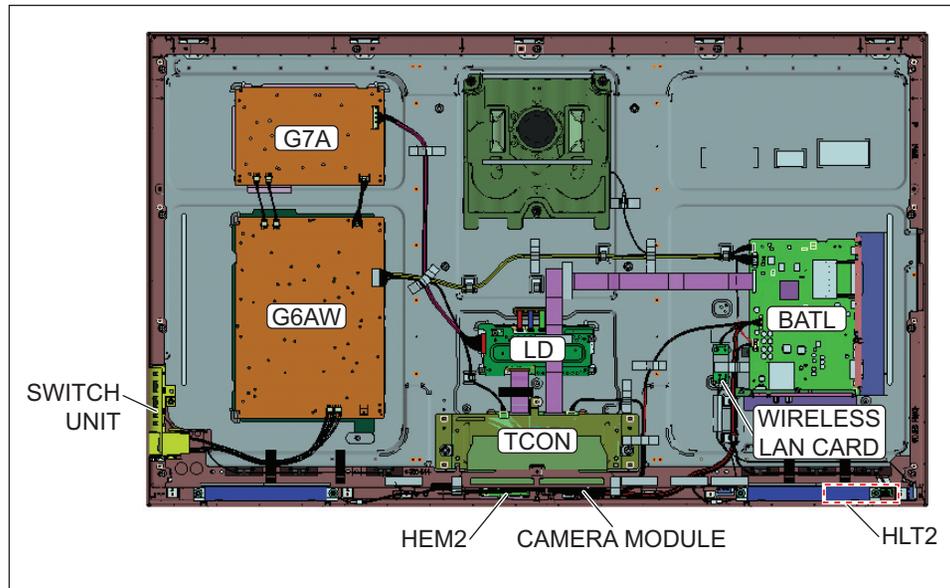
BOARD LAYOUT FOR KDL-55NX720 ONLY
